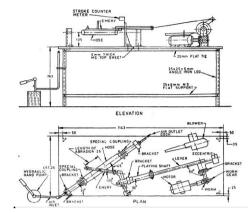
Genaral Arrangement of Abrasion Testing Machine
